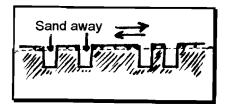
Same view, shows layer of surface that will be removed by sanding.
